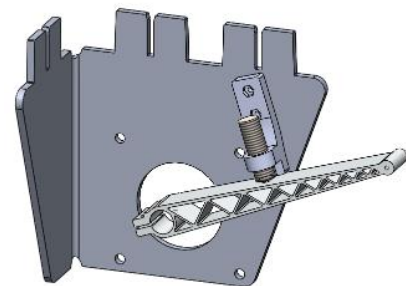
Assembly motor holder(Vexta), upper arm, sensor holder and sensor without bolts
